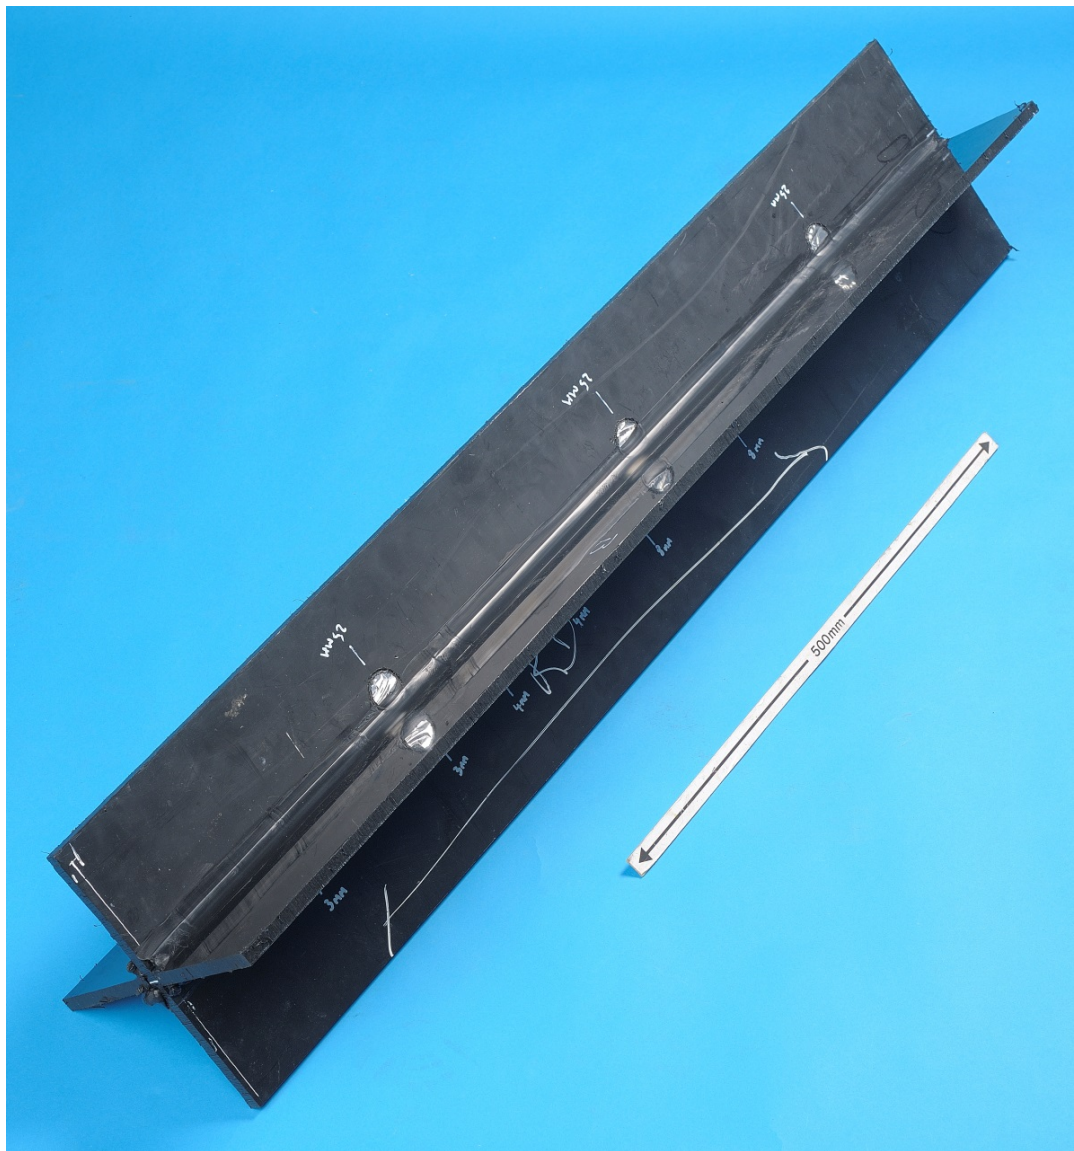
An extrusion welded cruciform joint containing partially embedded flaws.
